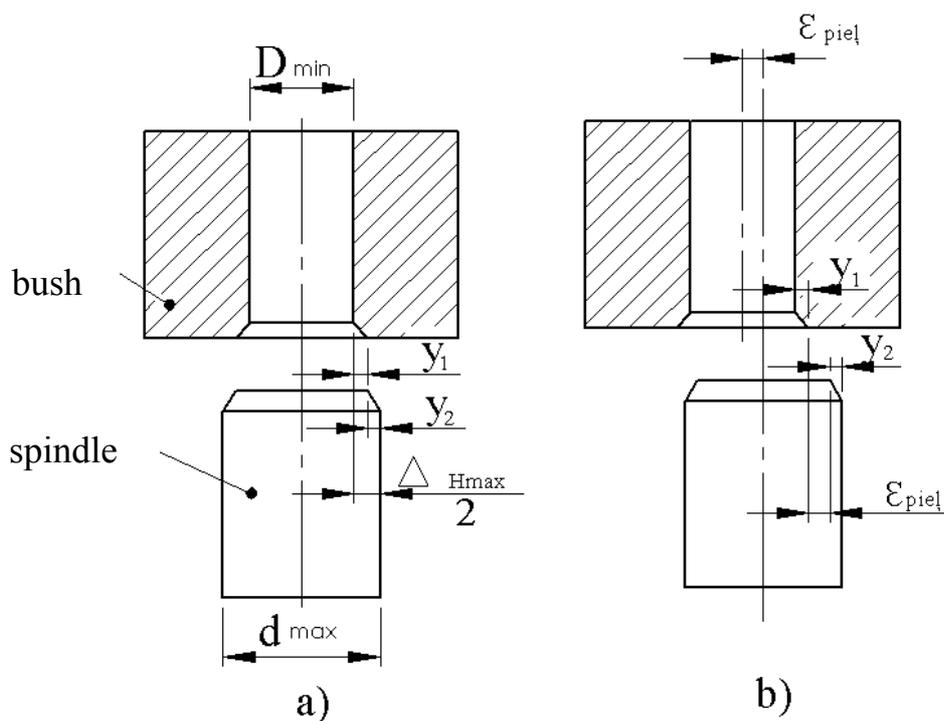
Schema of mutual layout of axes for spindle and bush
